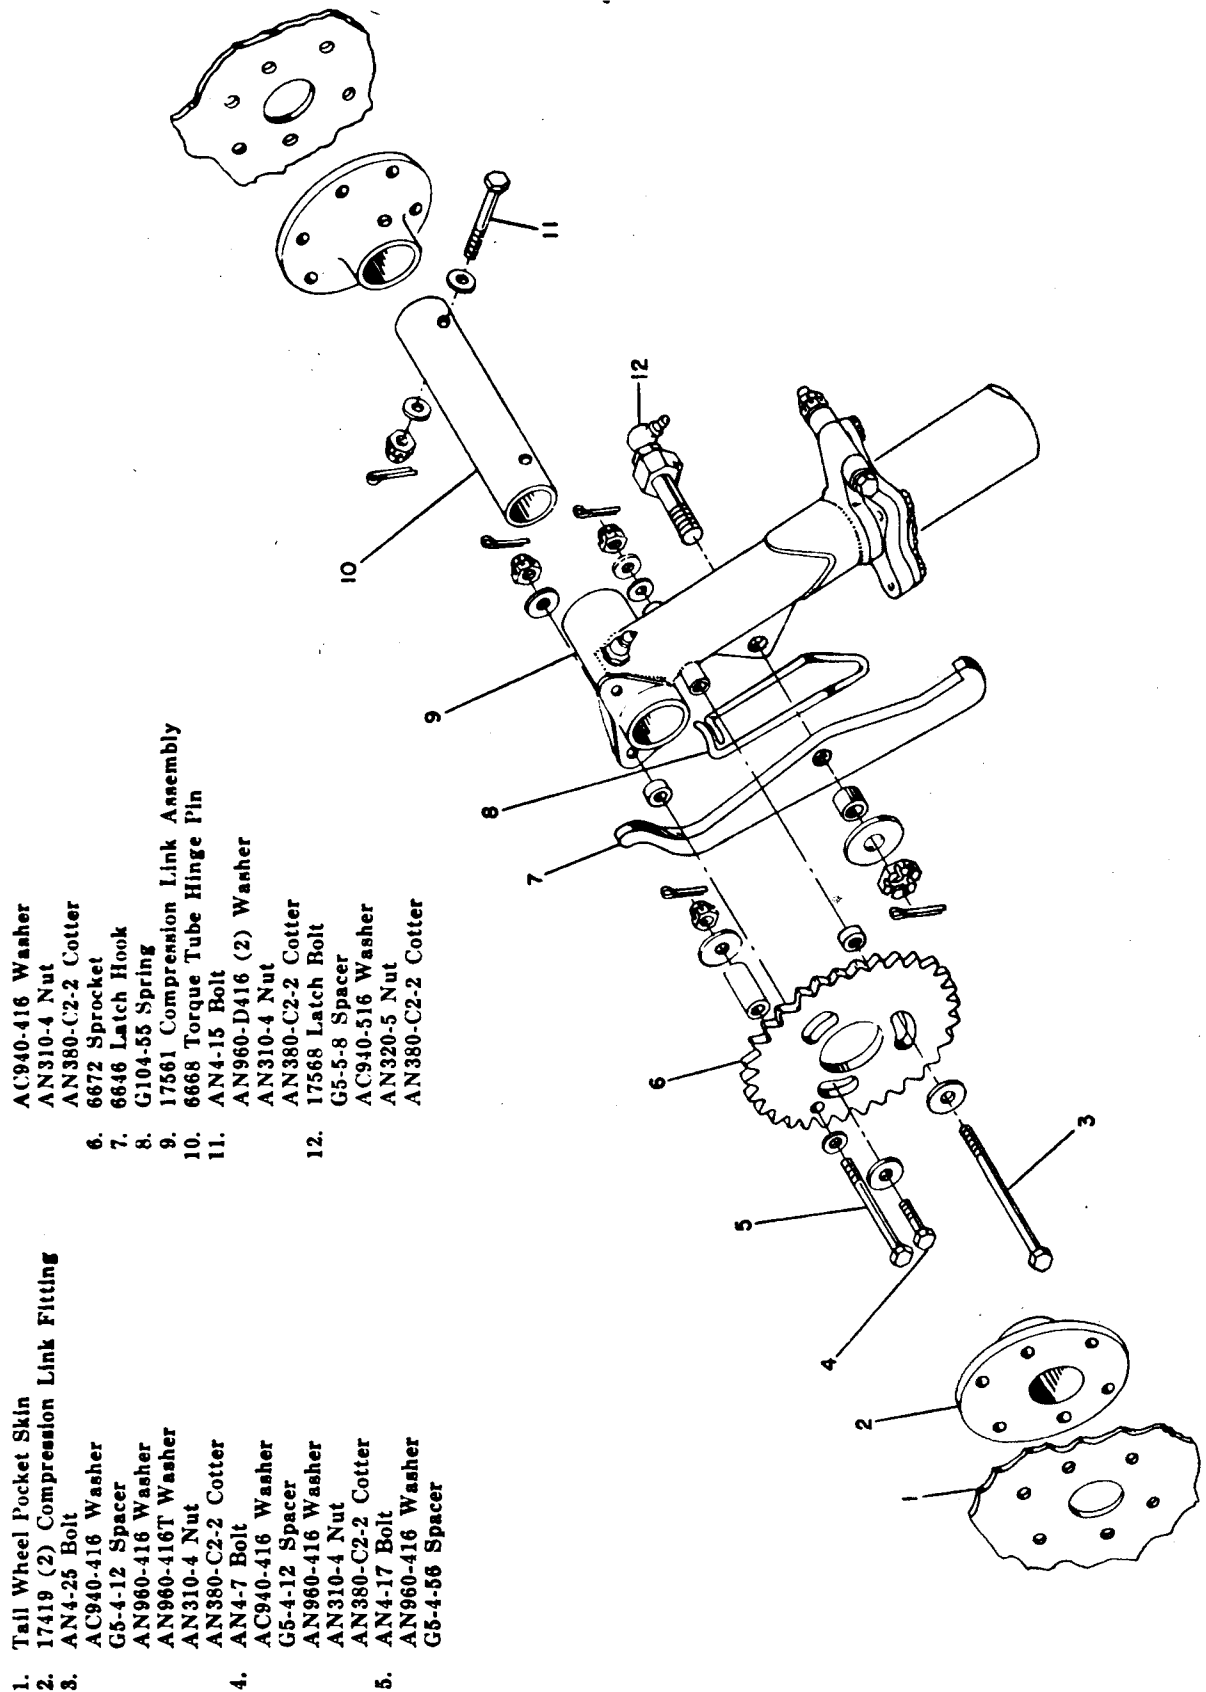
Tail Wheel Operating Mechanism—Exploded View
